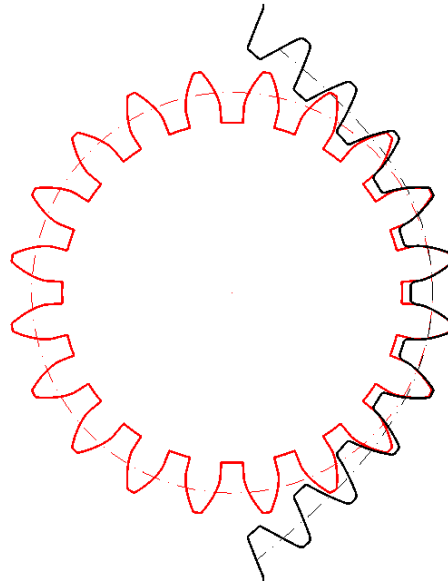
Pinion type cutter (red) and generated internal non-circular gear (black).
